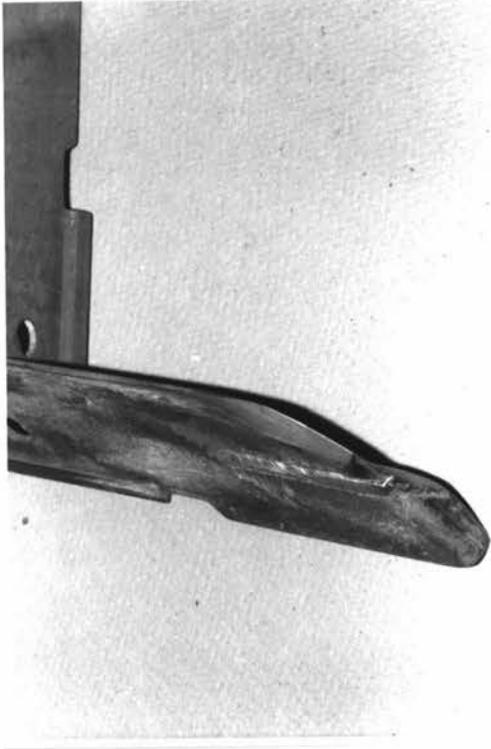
Field wear of EutecBor (-top pattern) welded over mild steel in Run A.
